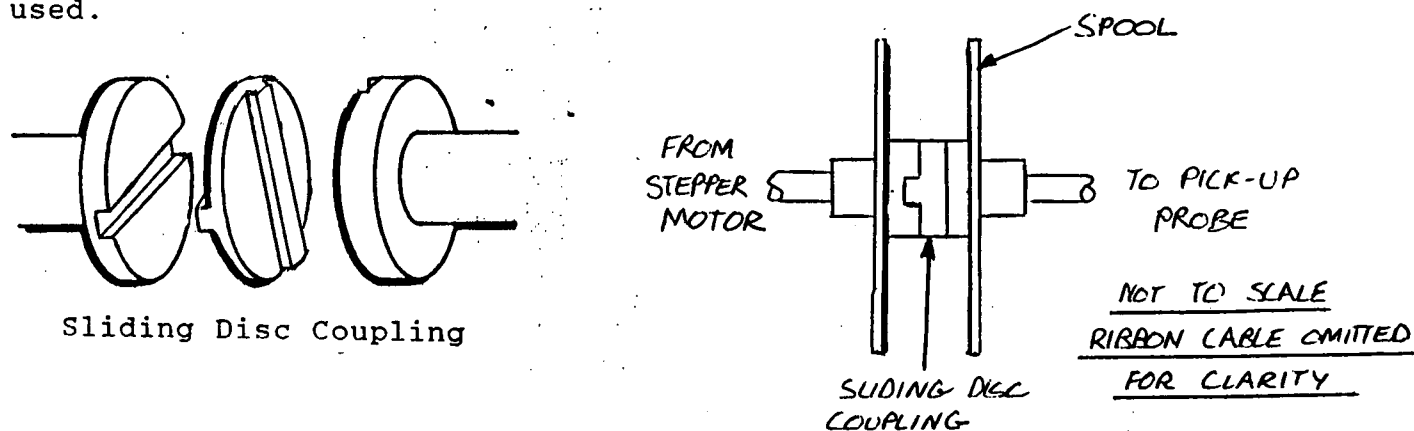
Sliding Disc Coupling Between Stepper Motor and Probe.
